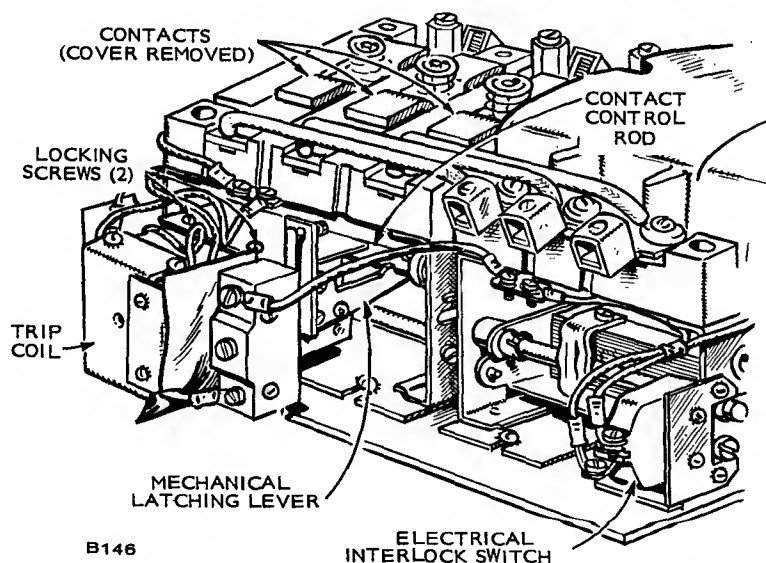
MECHANICALLY-HELD (LINE-SIDE) TRANSFER SWITCH
